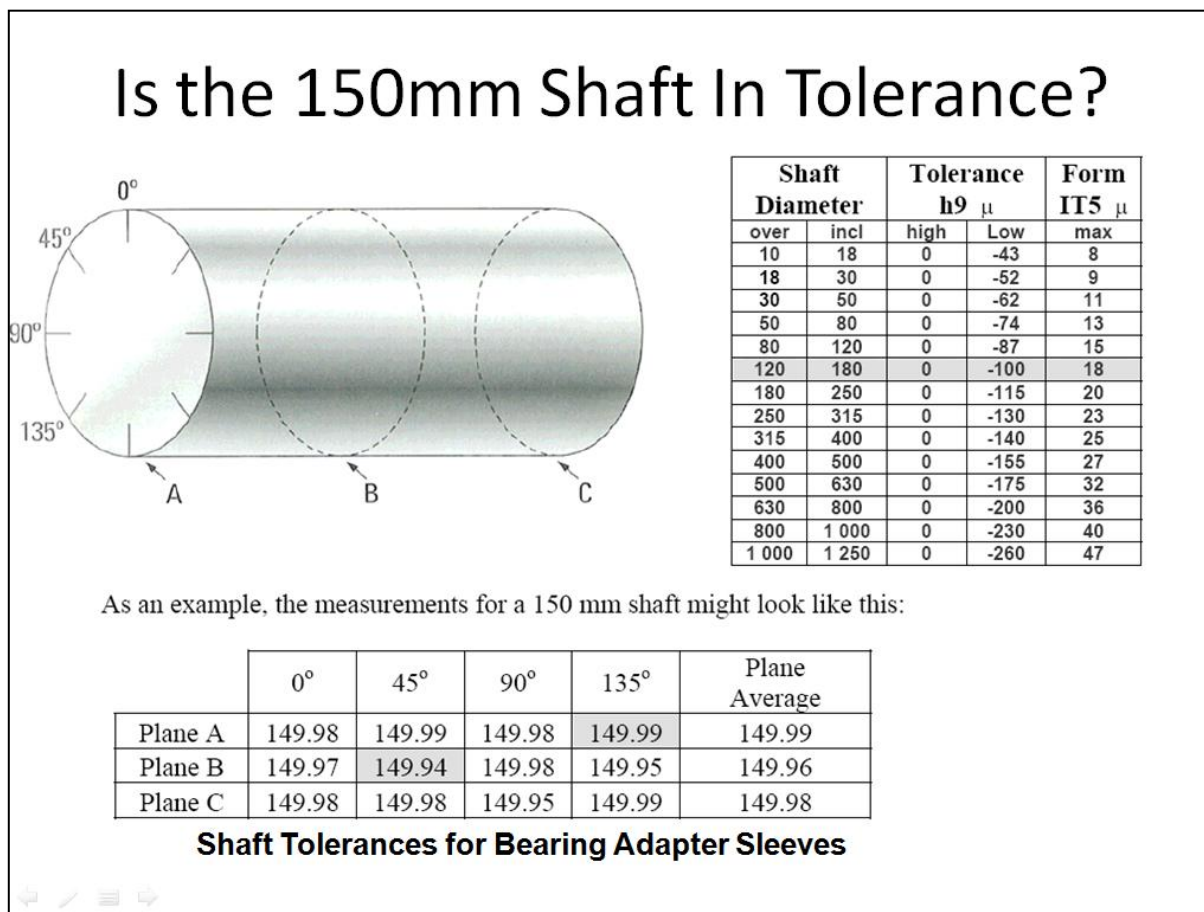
Shaft Condition is within Tolerance of the Bearing Manufacturer Requirements
